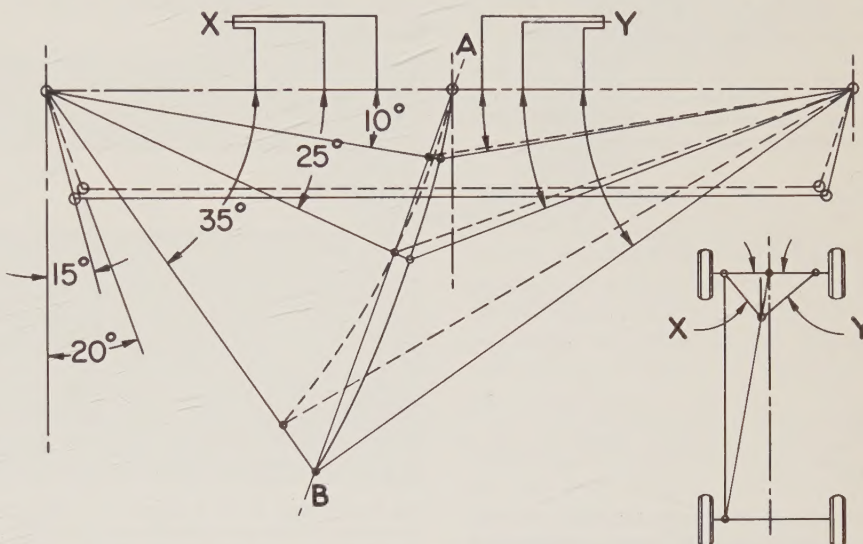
The angular relationships shown in Fig. 2 cannot be laid out on an ordinary drafting board in a size large enough for accurate measurement of steering geometry. For convenience, therefore, the designer uses the layout shown in the lower right corner in which the angles  $X$  and  $Y$  are the same magnitude as angles  $X$  and  $Y$  in Fig. 2. This relationship is constructed in a much larger view as shown at the top left. This view compares the effect of  $15^\circ$  (solid line) and  $20^\circ$  (dotted line) steering arms on the deflection of the front wheels. The deflection of the outer wheel during a turn, angle  $Y$ , is plotted for assumed deflections of the inner wheel, angle  $X$ . In this case, comparisons are shown for inner wheel deflections of  $10^\circ$ ,  $25^\circ$ , and  $35^\circ$ ; normally, the study is made at  $5^\circ$  intervals. Intersections of the lines describing angles  $X$  and  $Y$  form curves, as shown, for the  $15^\circ$  steering arm (solid curve) and for the  $20^\circ$  steering arm (dotted curve). These curves are known as steering-error curves since their deviation from the line  $AB$  indicates the error in steering angles. Deviation to the right of line  $AB$  indicates that the right wheel will turn at a sharper angle or will *oversteer* the left wheel. Thus, the designer can observe from this layout that a  $15^\circ$  steering arm angle will cause the right wheel to oversteer the left wheel through  $35^\circ$  of steer of the left wheel. Using a  $20^\circ$  steering arm angle, however, causes a very slight oversteer effect through only  $25^\circ$  of the left wheel steer. To minimize abrasion of rubber and to provide the best control, the steering arm angle is usually selected to give the closest relationship through the turning range which will commonly be used, or about  $25^\circ$  of steer of the inner wheel.
